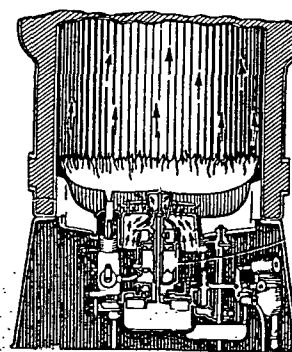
CENTER FLAME VERTICAL ROTARY BURNER
